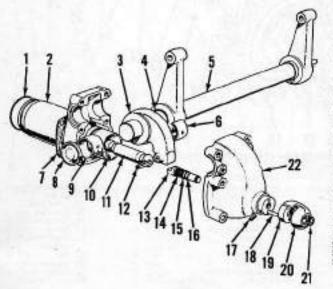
Exploded view of rockshaft cylinder, brackets and rockshaft.
